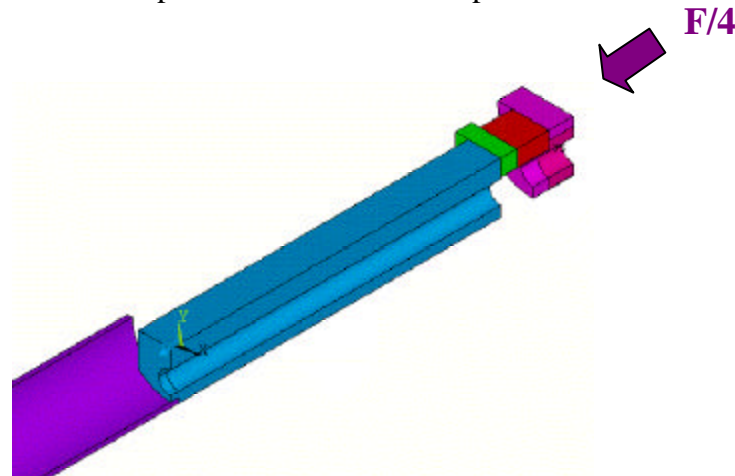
ANSYS model representing a quarter of the whole assembly. In Figure (from left to right), the purple part is the tube, the blue one is the top plate, the green block is the insulator, the red one is the cable, and the magenta one is the bottom plate. A quarter of the 20 ton load, $F/4$ in Figure, was applied to the bottom plate as described in more detail in Figure 4.
